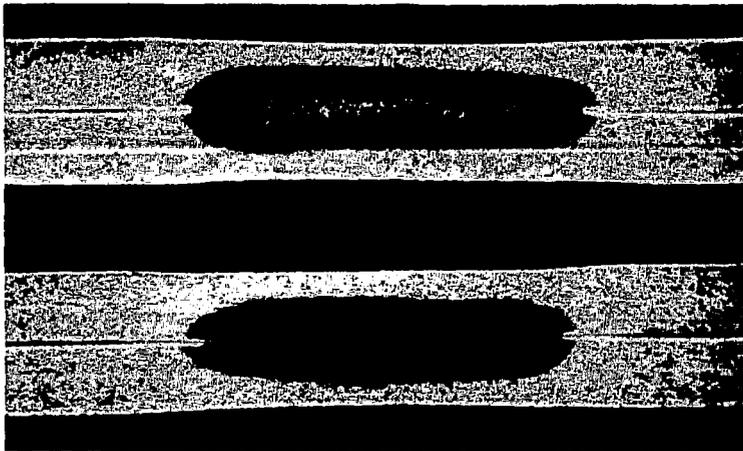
Photograph of a Typical (failed) Sheet Efficiency Test Piece Used in Fatigue Tests.
